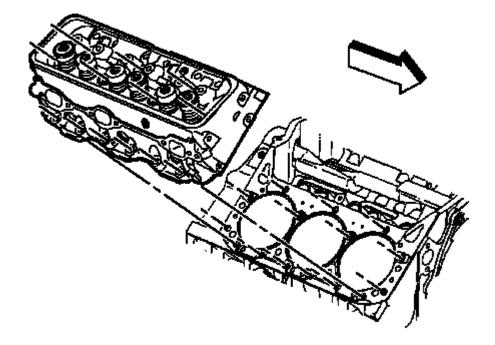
Removing/Installing Cylinder Head (Right) Courtesy of GENERAL MOTORS CORP.
